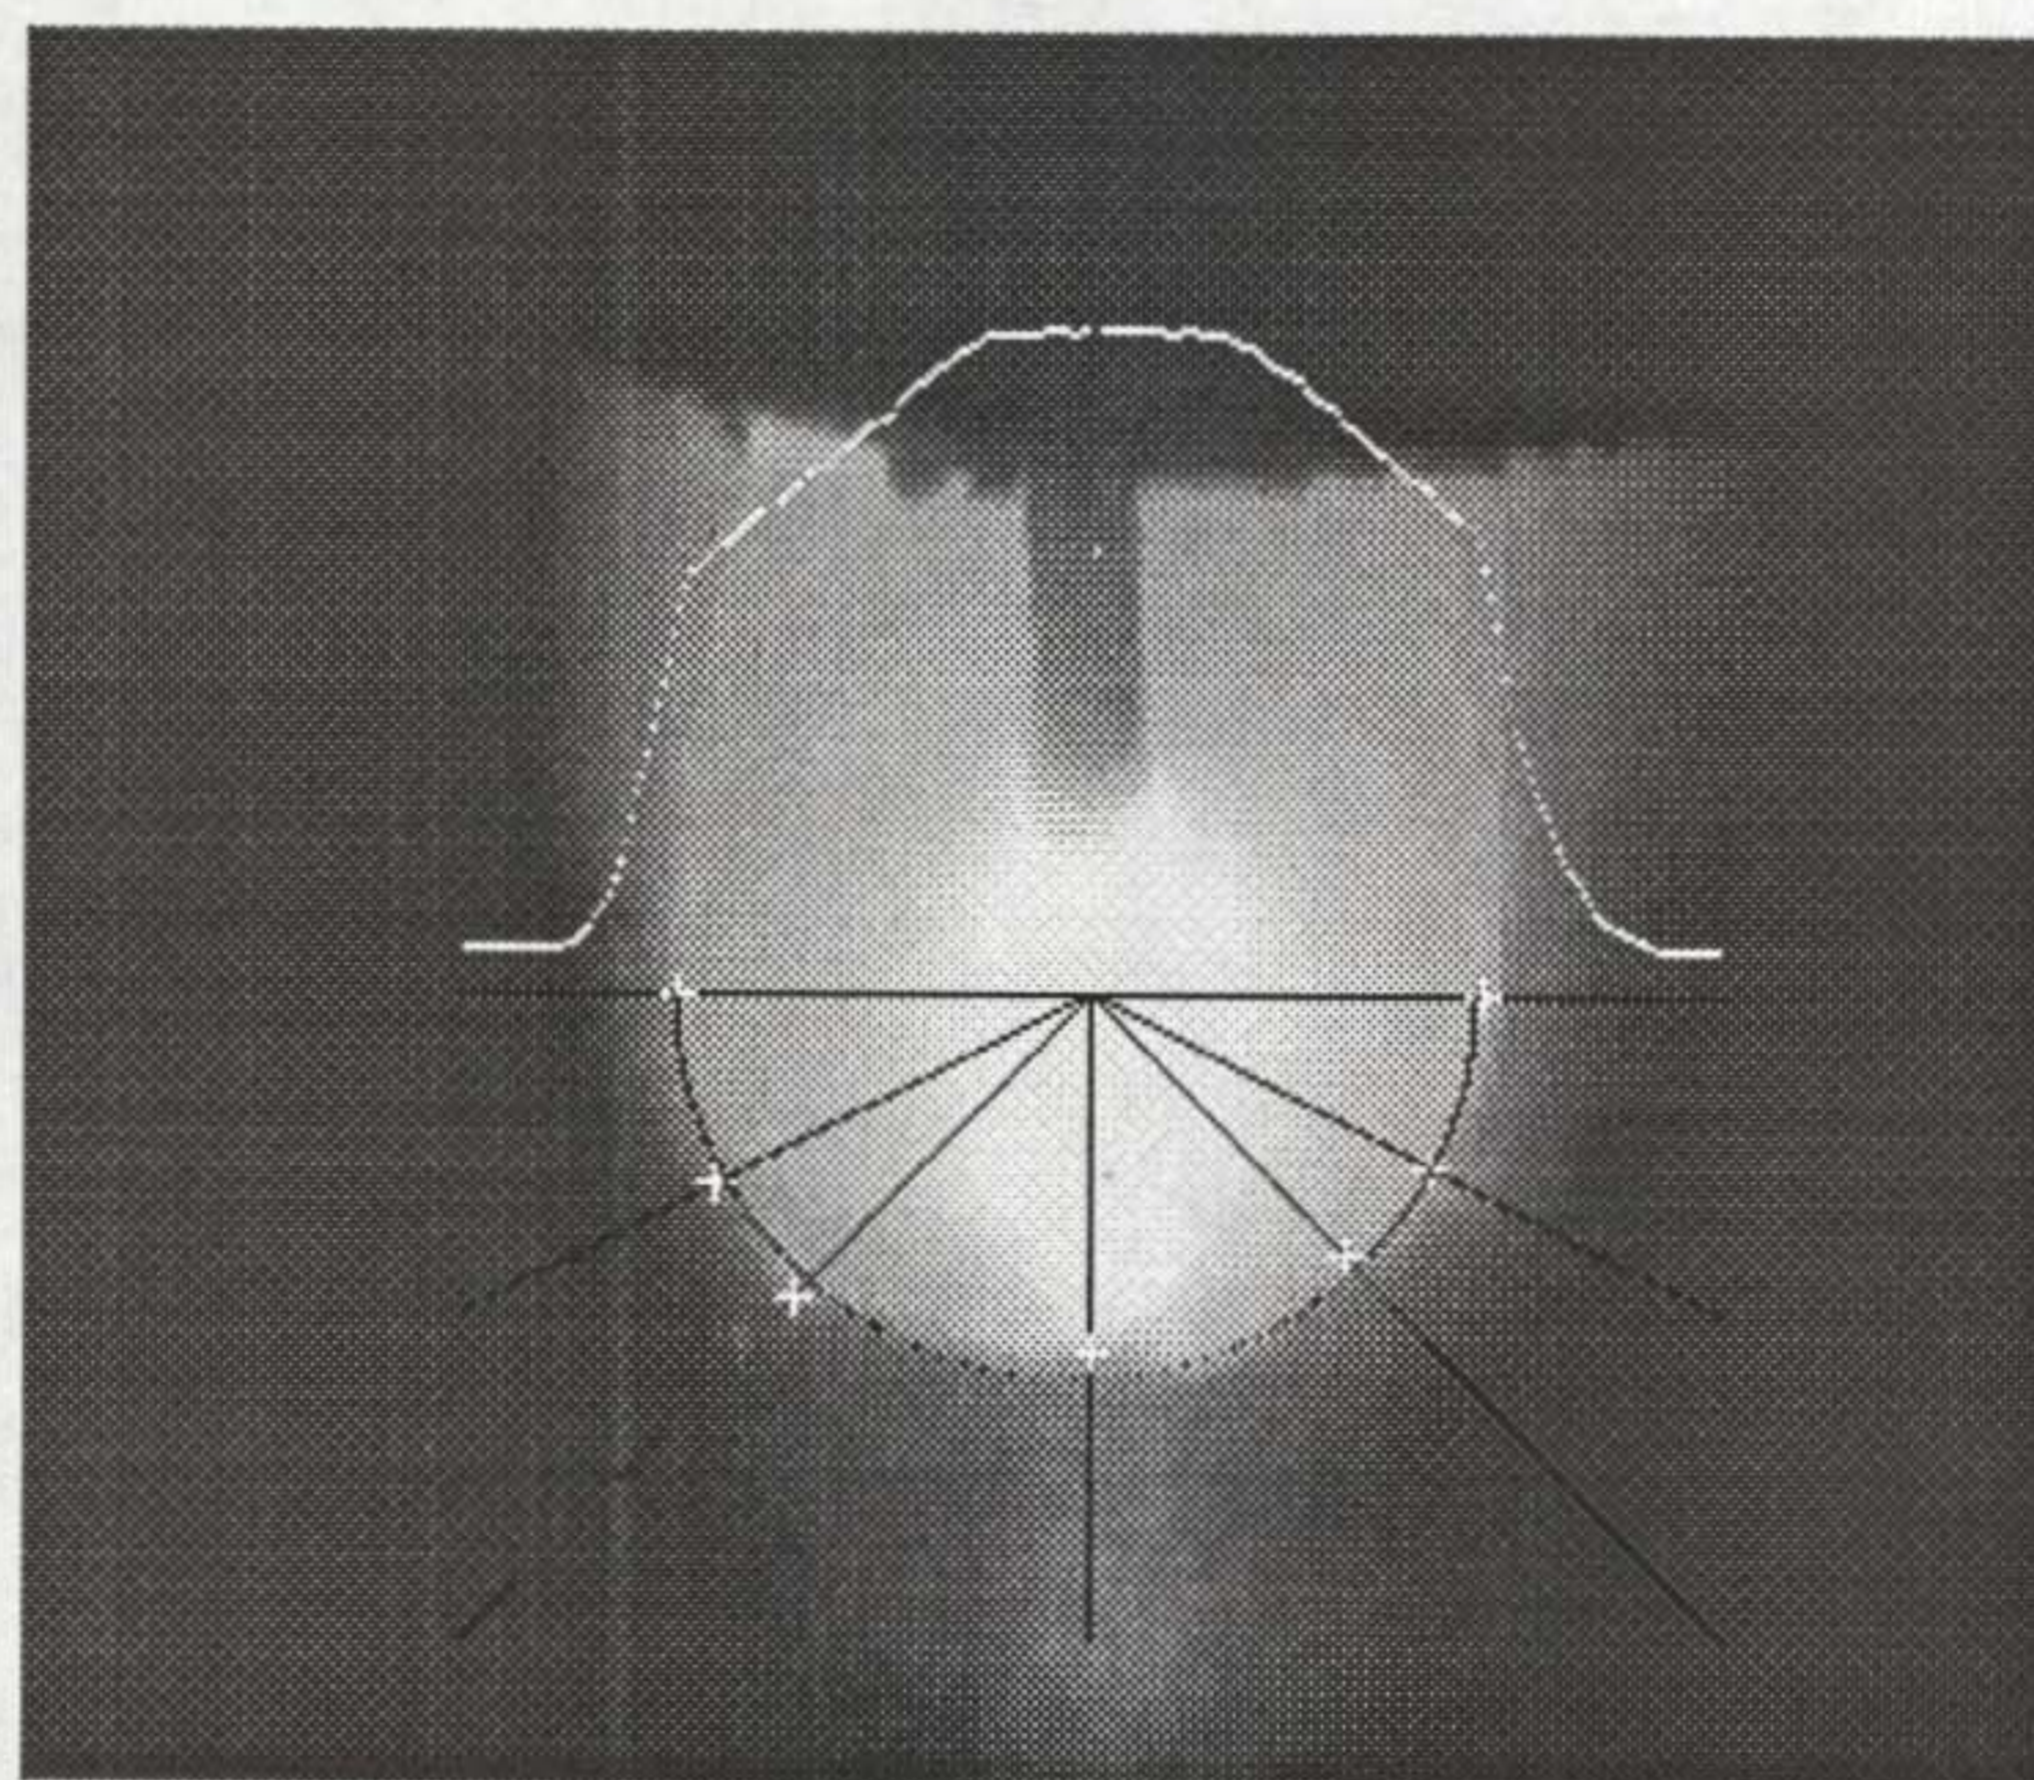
Ellipse Model of MIG Weld Pool
